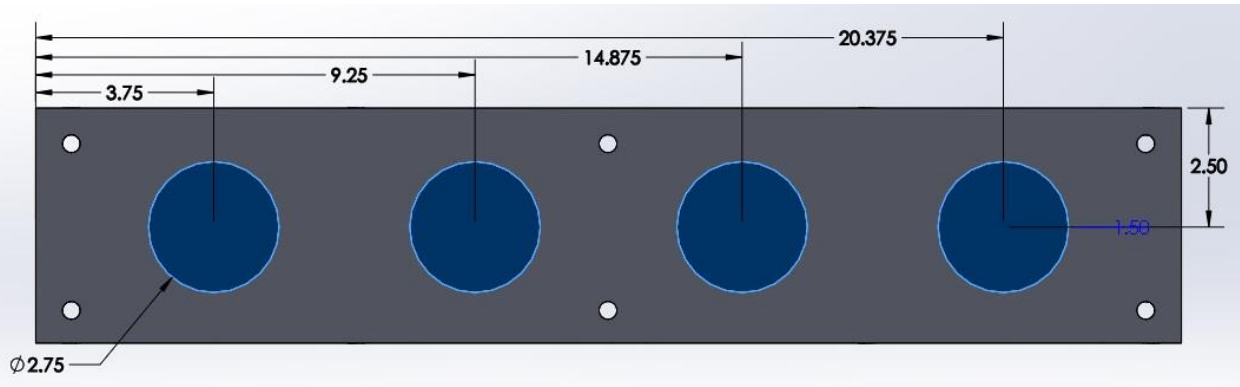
Dimensions of the holes cut to fit the syringe tubes.
